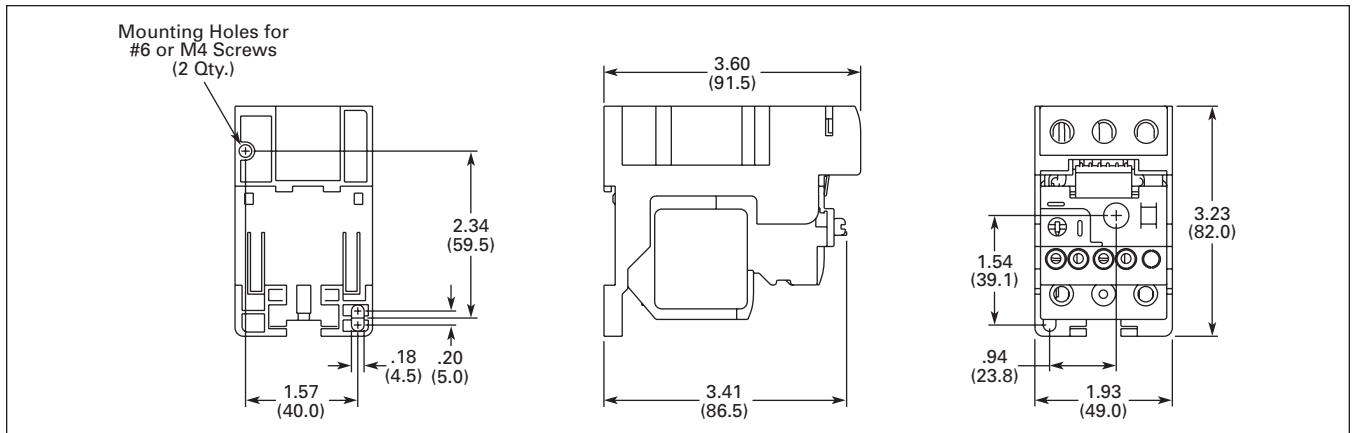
45 mm Stand-Alone C396 Electronic Overload Relay — Approximate Dimensions in Inches (mm)
